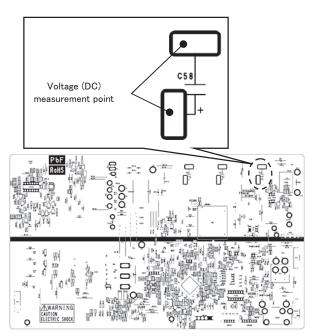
Voltage measurement point (Solder face of PCB (Main))
